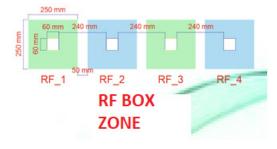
Dimensions of the area where RF boxes will be taken(top view)
